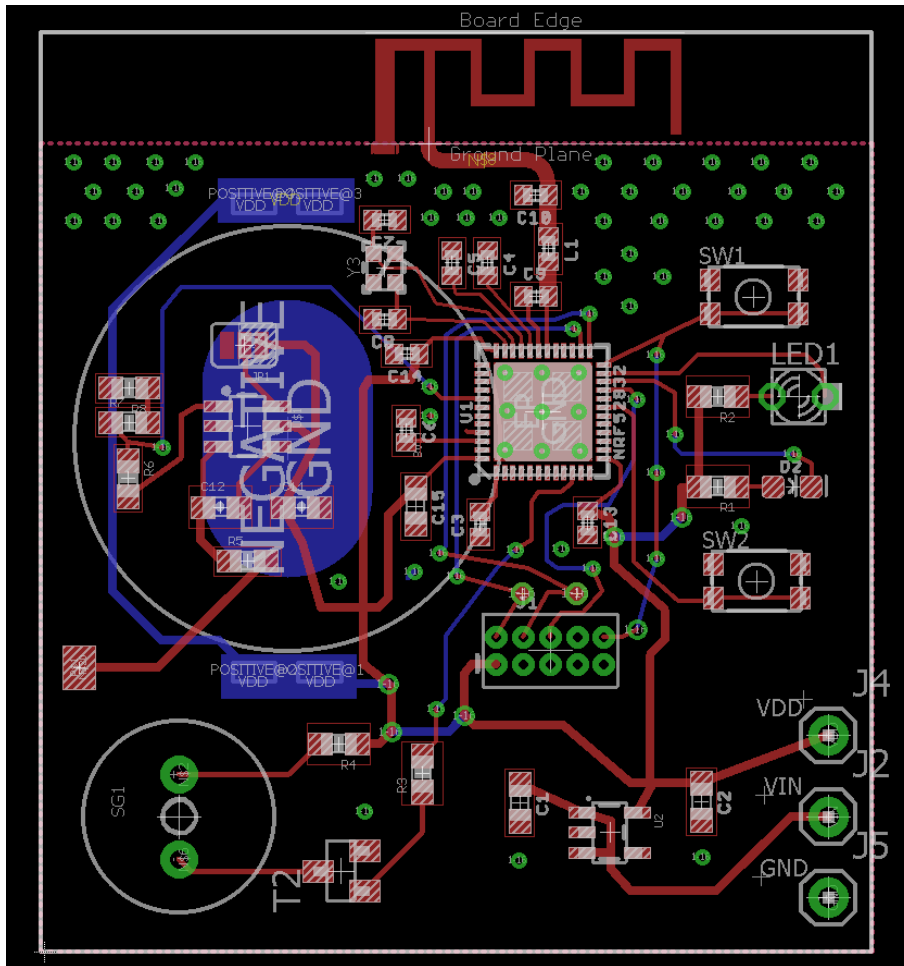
PCB layout for complete custom prototype with hand soldered nRF52 SoC.
